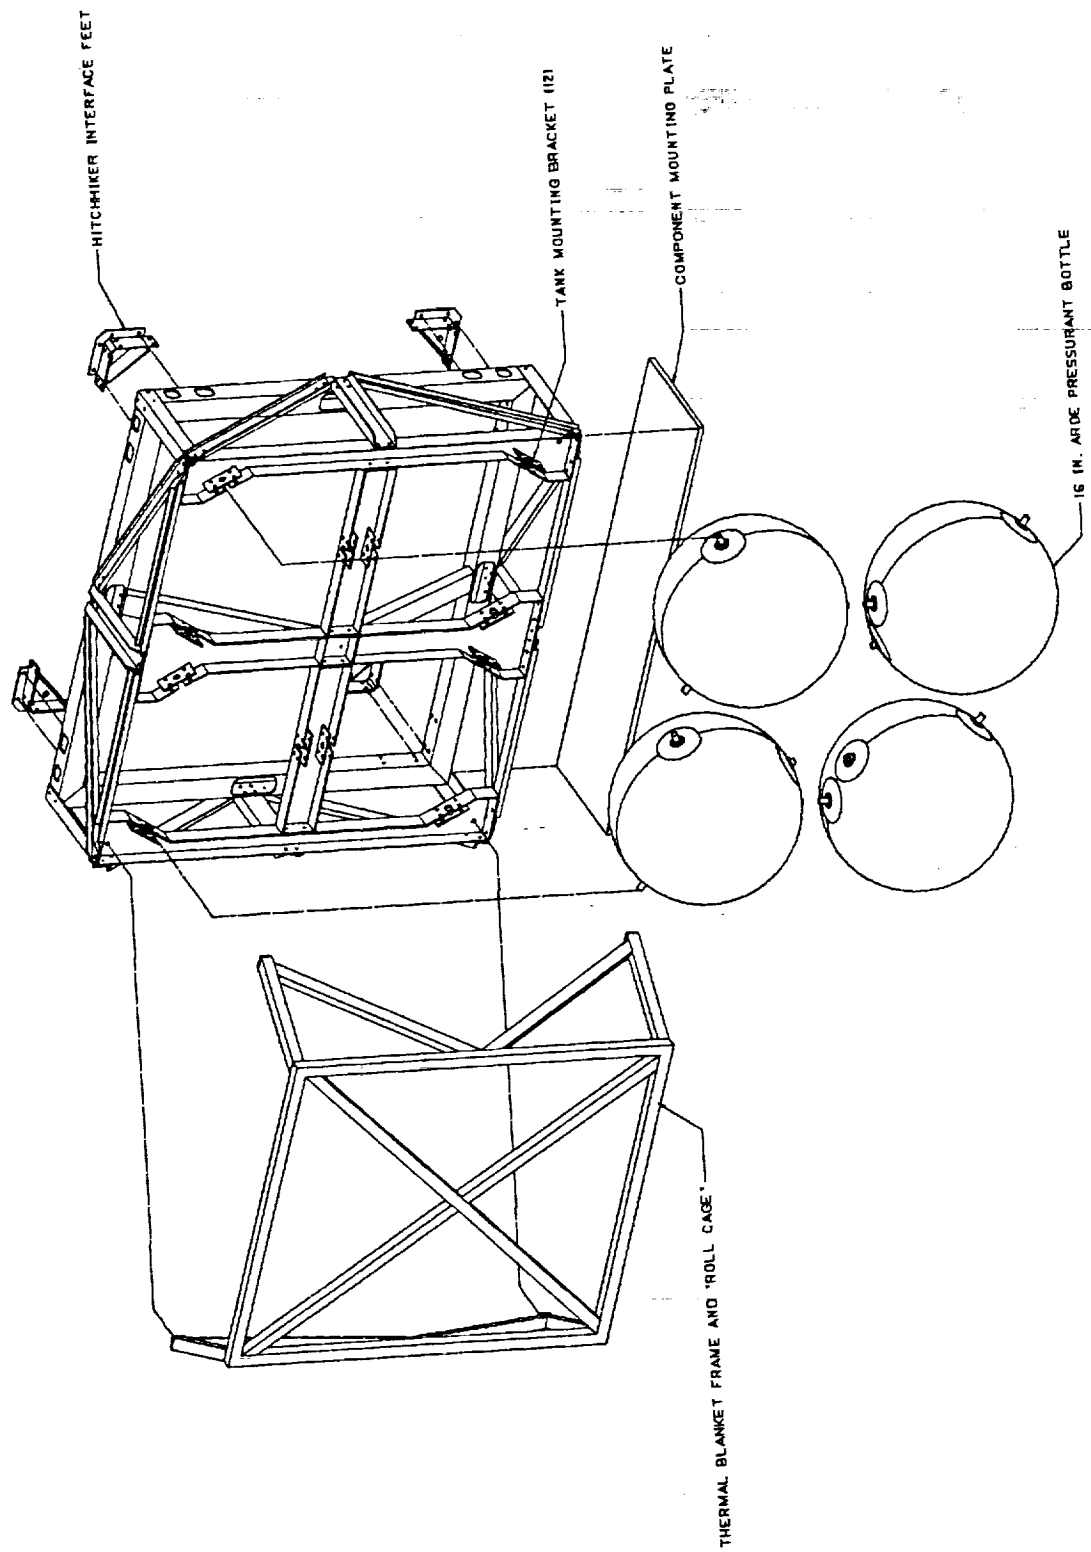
, Exploded View of Pressurant Bottle Carrier
